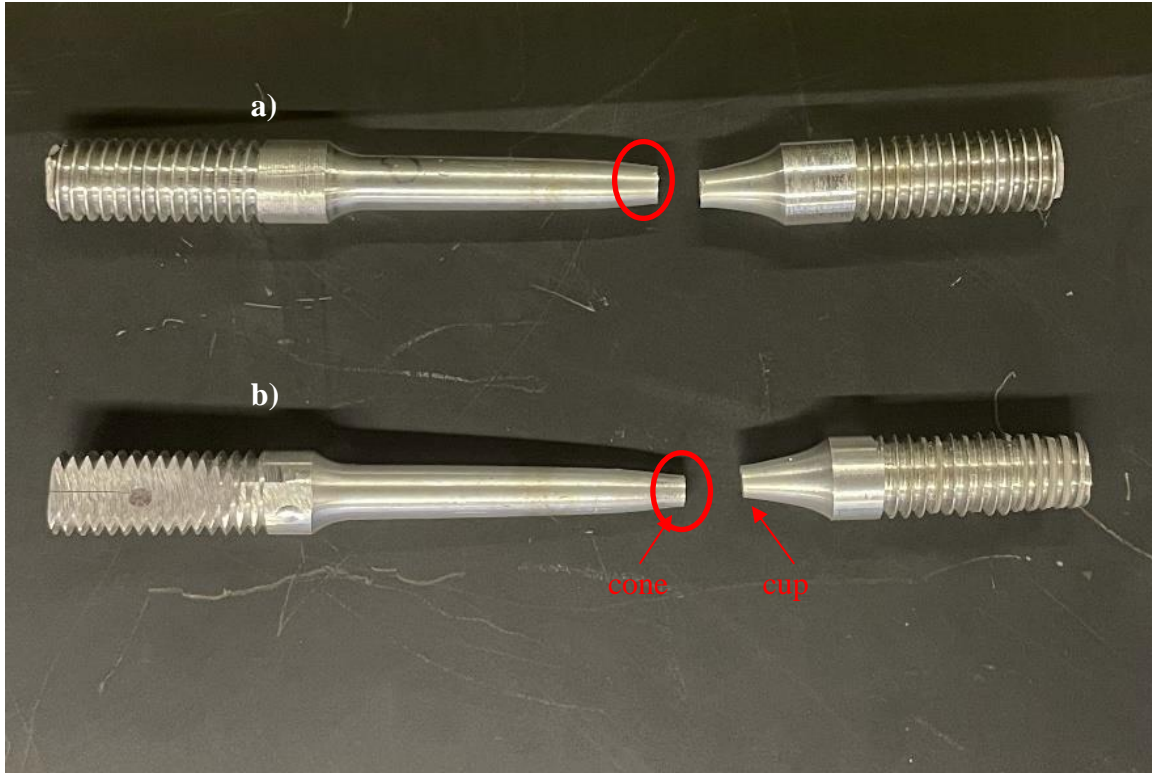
Fracture tensile samples a) as-extruded, b) 432 °C - 4.5 hrs.
